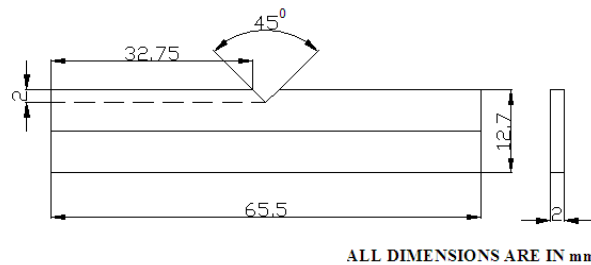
Izod Impact Test Specimen as Per ASTM D256
